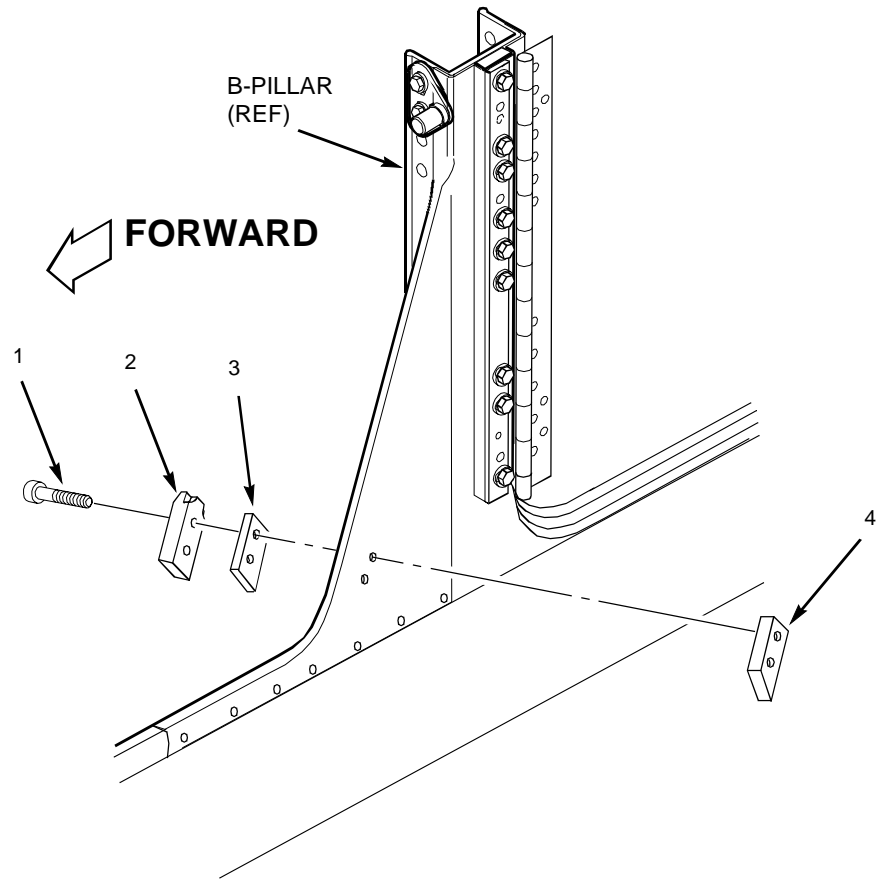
Front Door Ramp Block Installation (2 and 4 Door)
